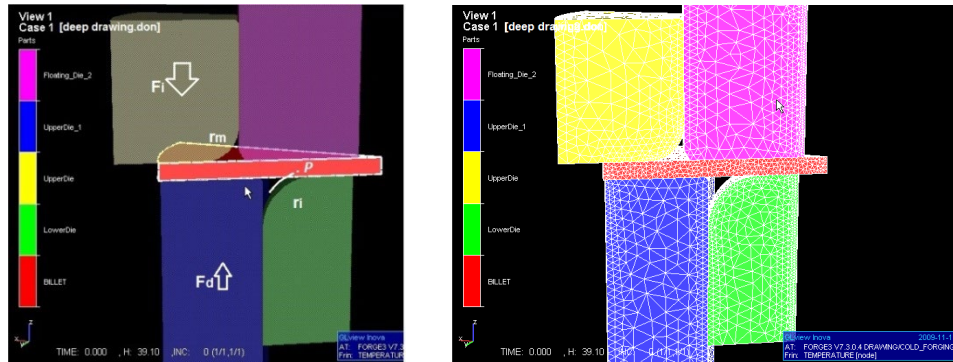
3D model of deep drawing tool and FEM mesh of the key parts
